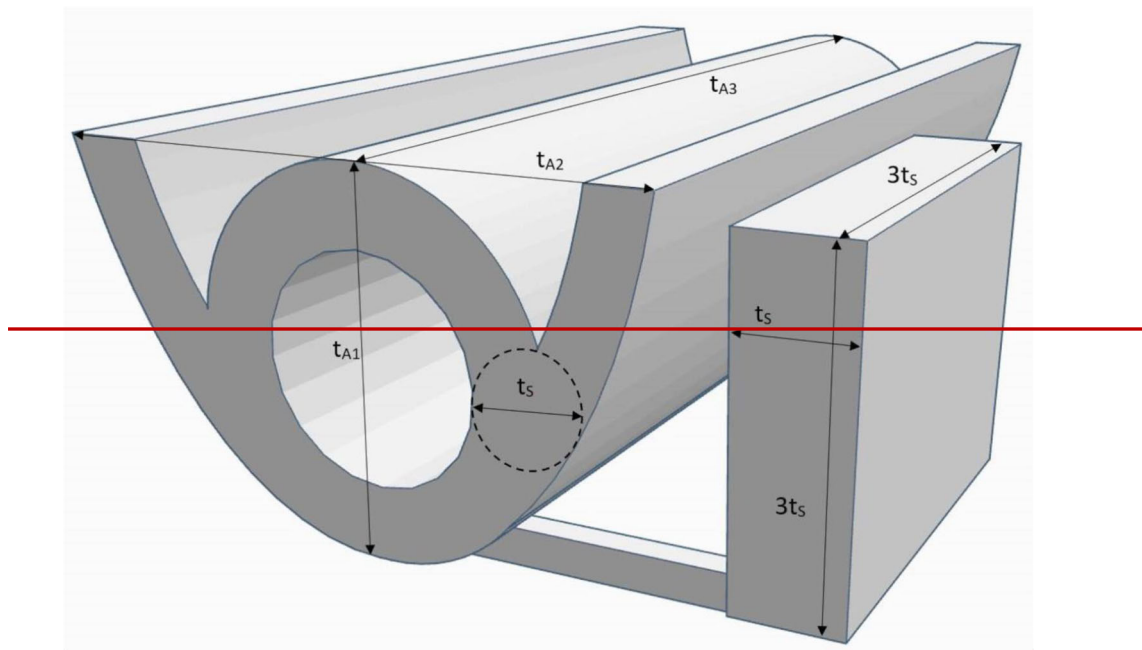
Example 2: test block-gated to stern tube casting
